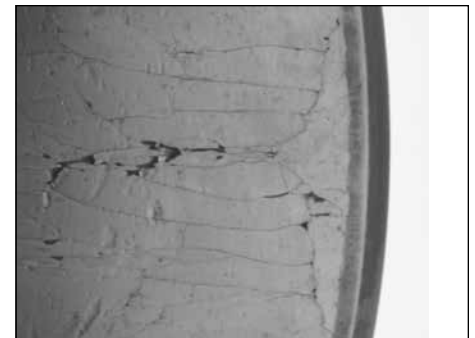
This cylindrical roller bearing inner ring was crushed by an application failure during service.
